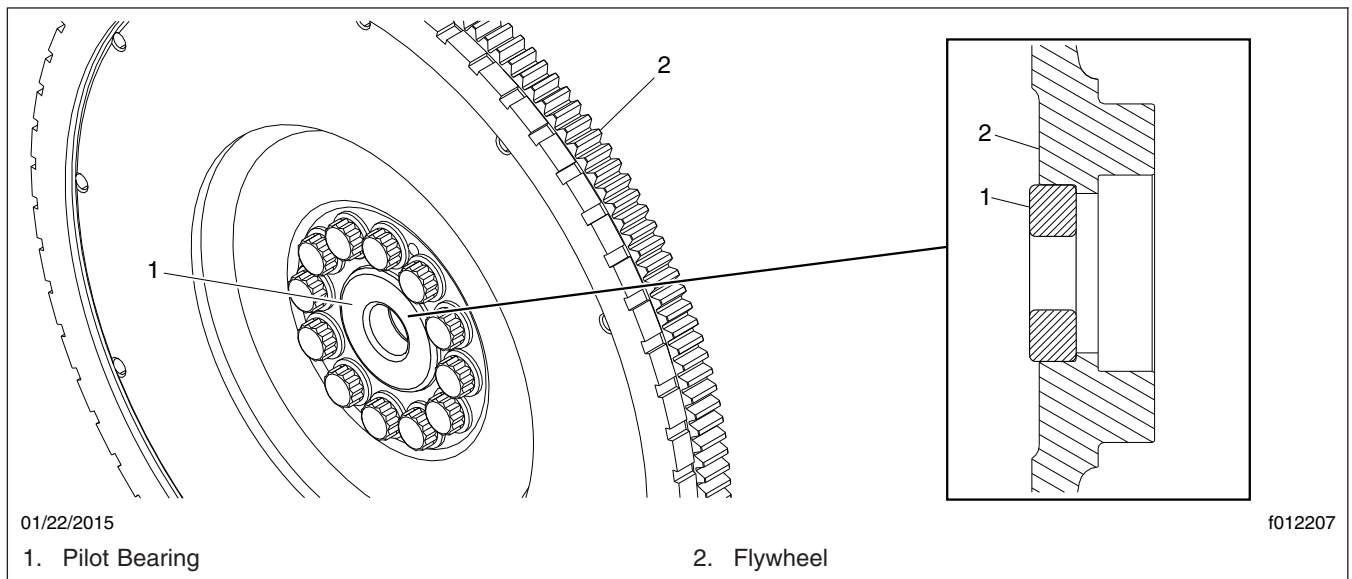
, Position of Pilot Bearing When Spacer Is Not Needed
